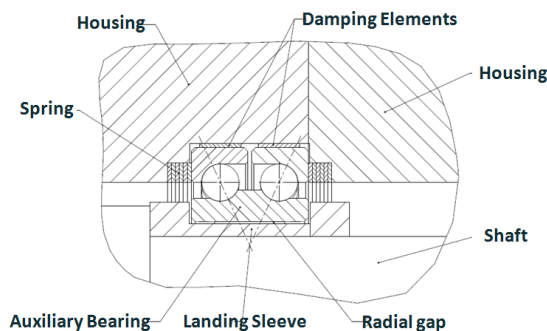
Cerobear auxiliary ball bearing Fig. 2. Typical AUX system
